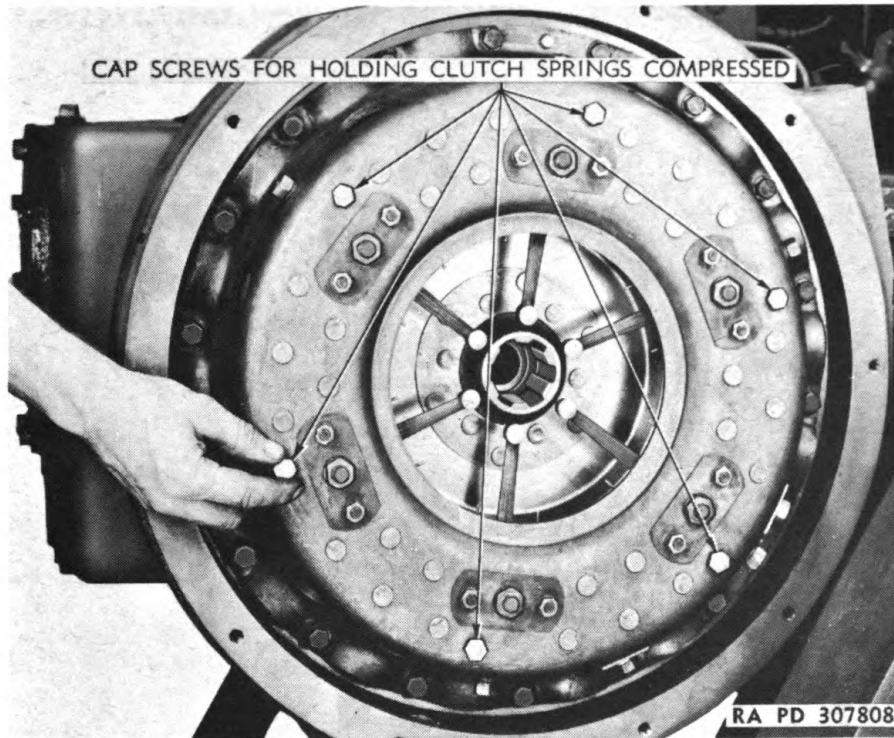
Installing Cap Screws To Hold Clutch Springs Compressed
